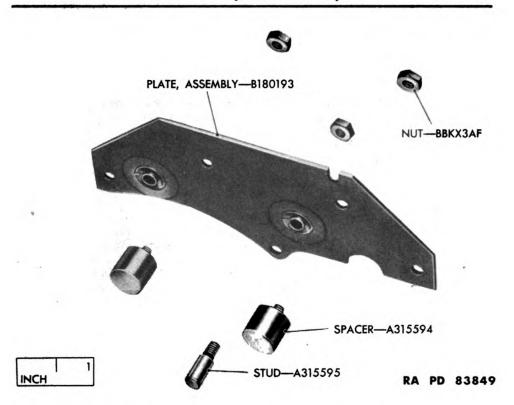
Tracking Lever Spacers and Elevation Tracking Lever Eccentric Stud Exploded From Elevation and Azimuth Cam Follower Bracket Assembly
